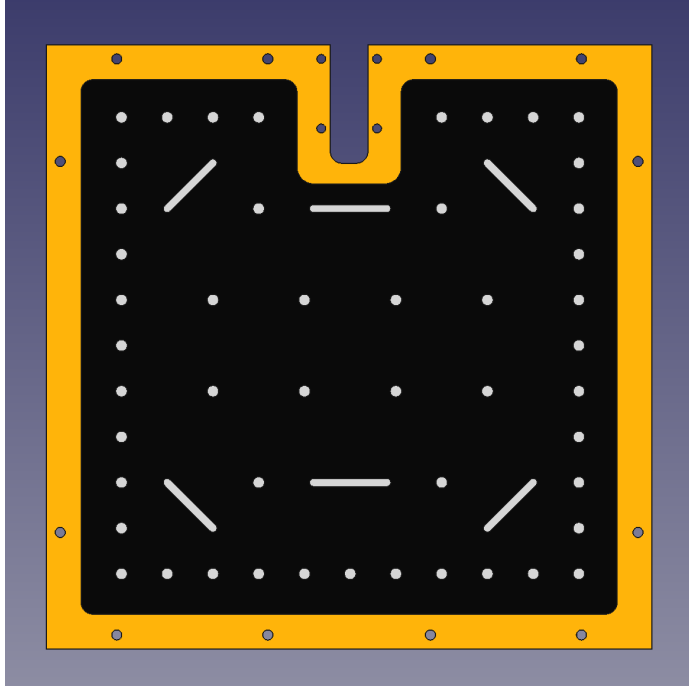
CAD drawing of the SLAC Cube cathode with nominal test pattern
